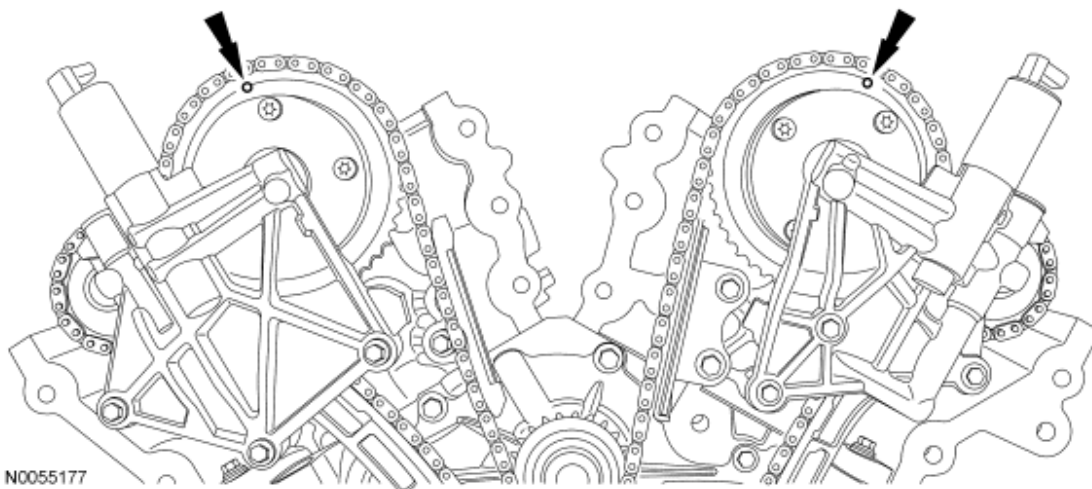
Aligning Timing Marks On Variable Camshaft Timing (VCT) Assemblies
